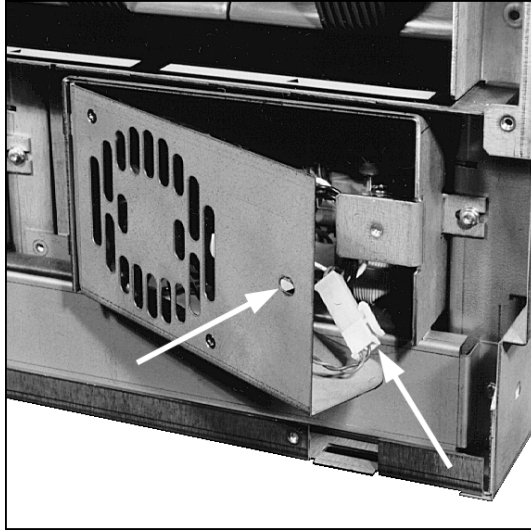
Removing the Fan Assembly From the Rear of the Drive
